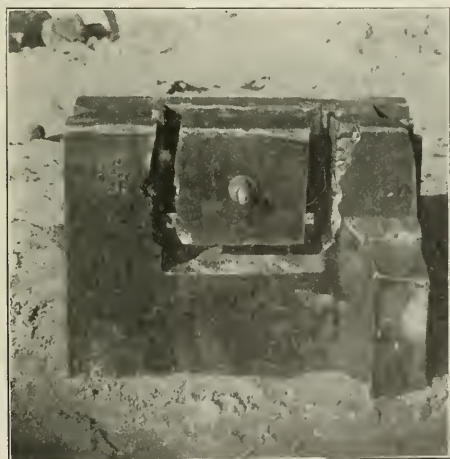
STEEL HAMMER BEFORE WELDING, AFTER CUTTING OUT THE SECTIONS TO BE REPAIRED.
